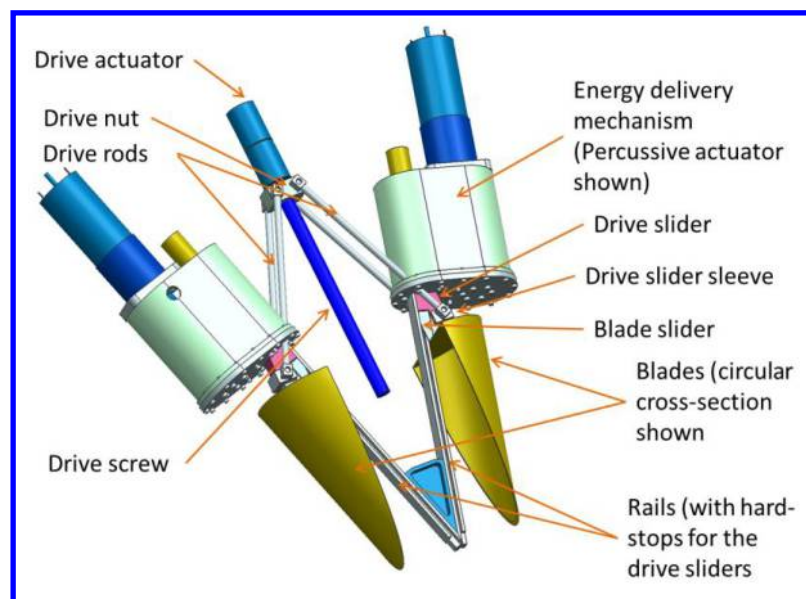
Preliminary design of the sampling tool using two percussive mechanism units and a linear drive actuator
